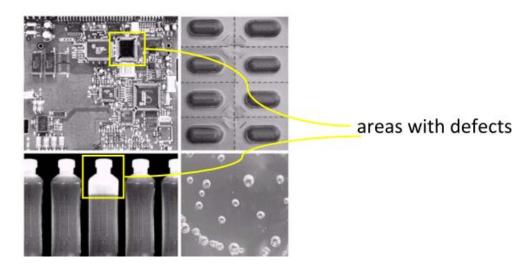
5 : Examples of industrial inspection for defective products (Zhang,2013)
